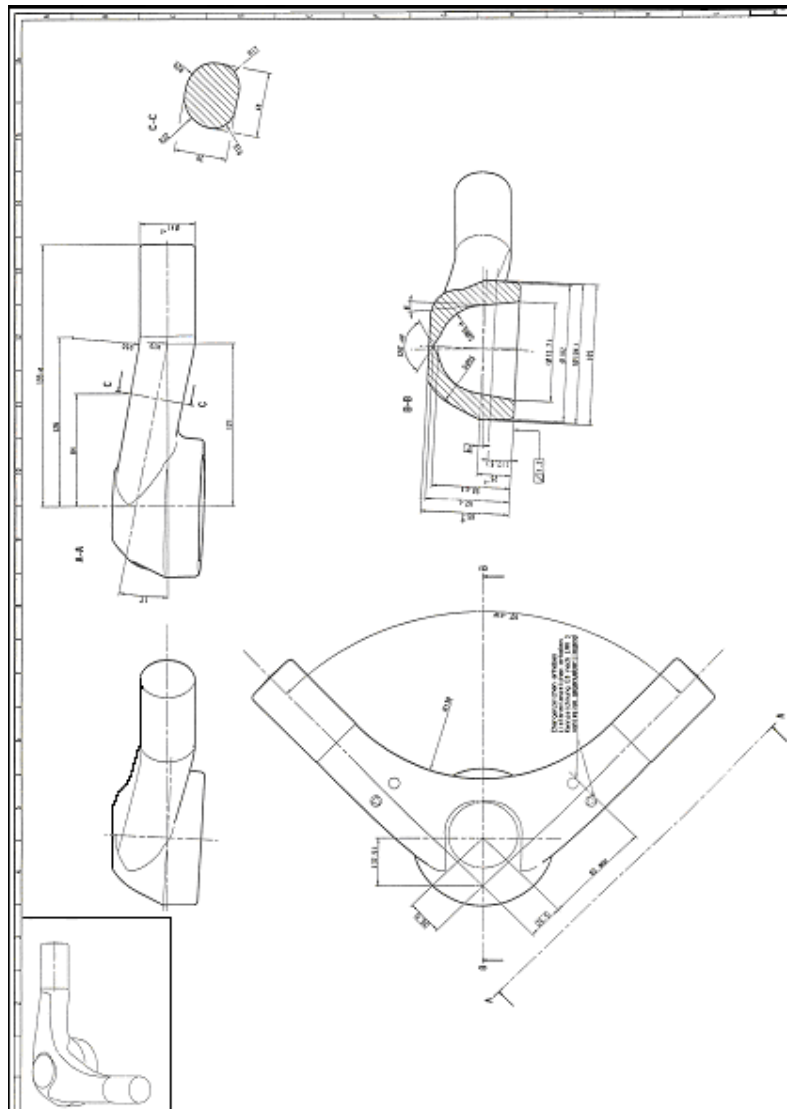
Technical Drawing of “Ball Joint” [5]
